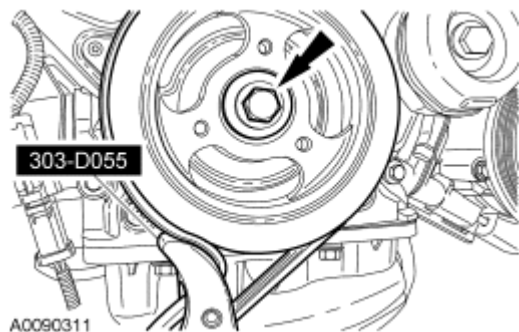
Identifying Special Tool (303-D055) And Crankshaft Pulley Bolts
